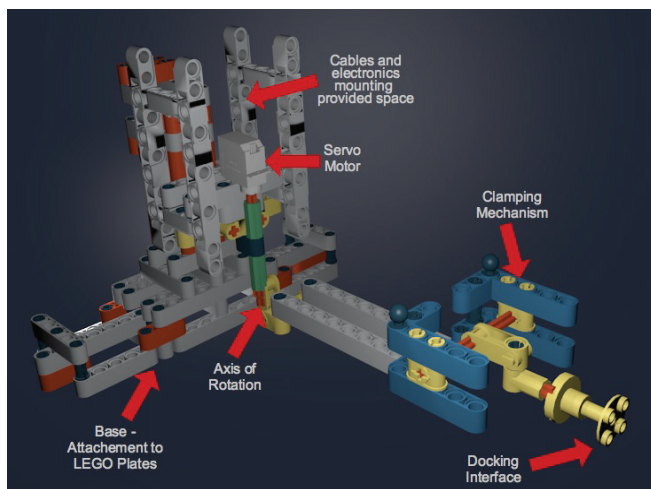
LEGO® robotic arm with docking mechanism and servo motor
